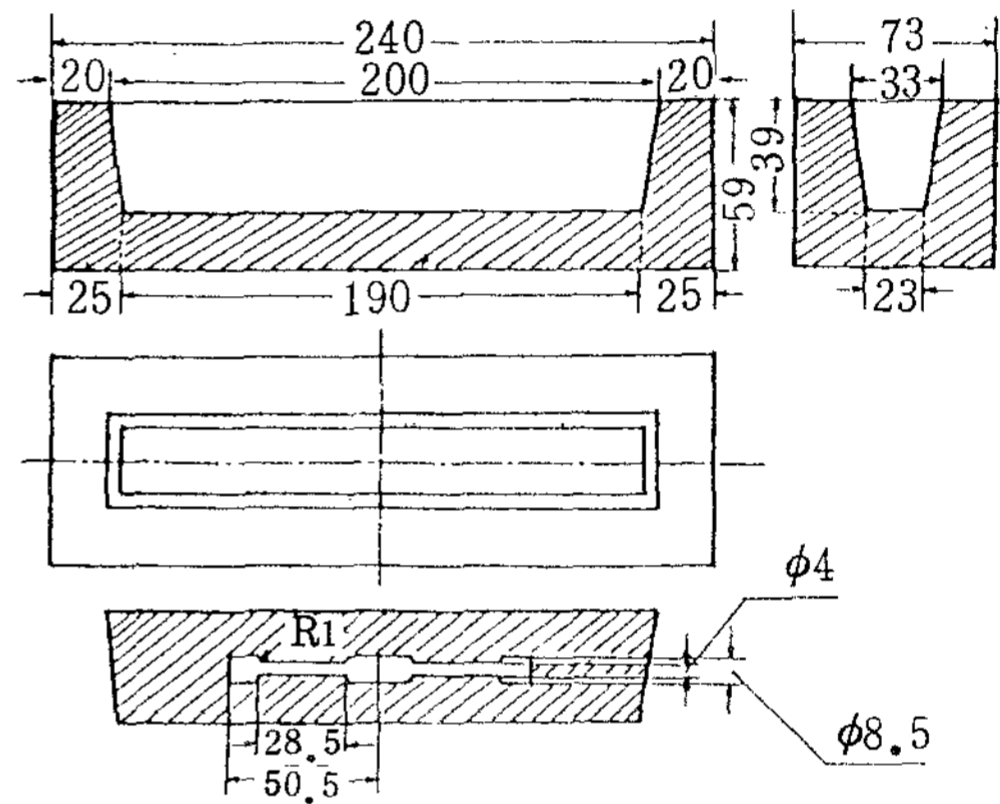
Schematic diagram of mold & tensile specimen (mm).
